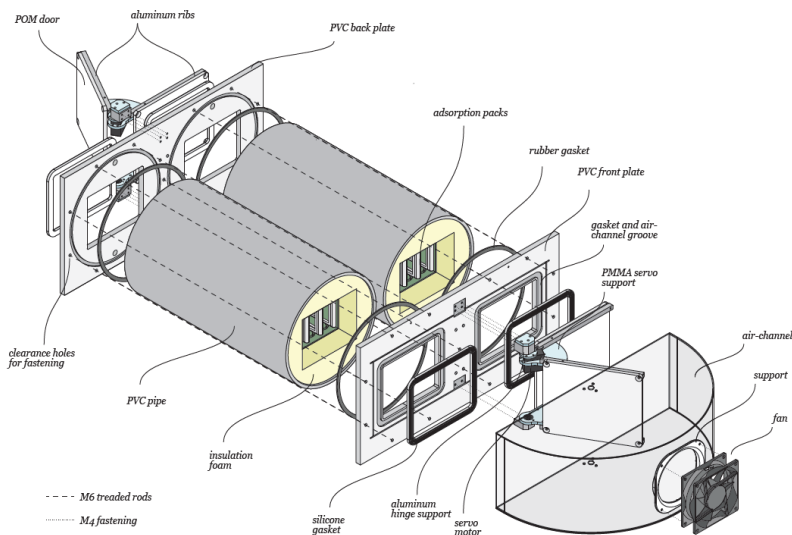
Isometric assembly of DAC prototype - 1 [8]
